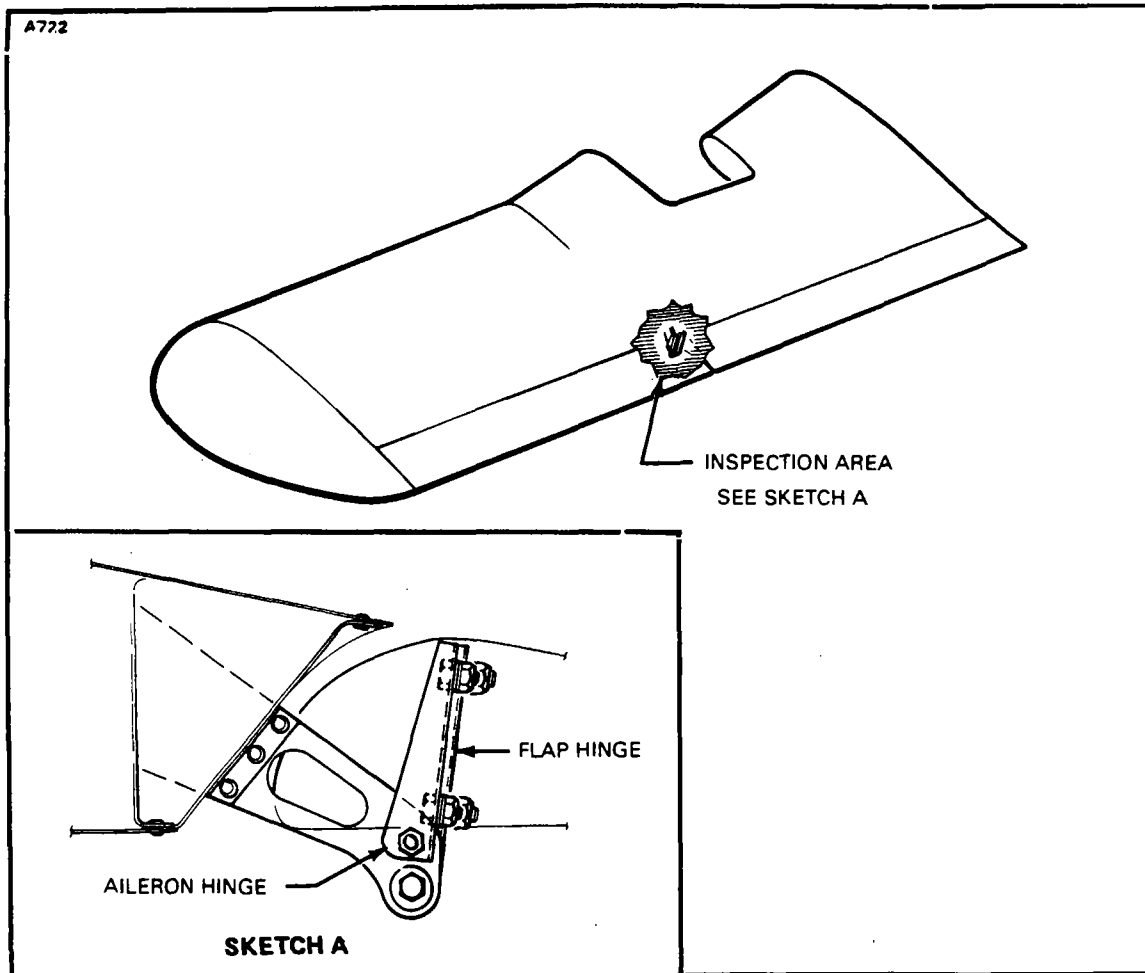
Inspection of Outboard Flap Hinge, Serial Nos. 27-3050, 27-3154 to 27-7405330 incl.
